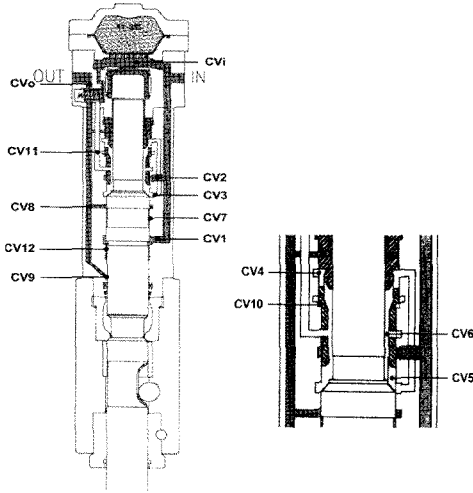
Schematic cut view of an integrated-type fully-hydraulic breaker
